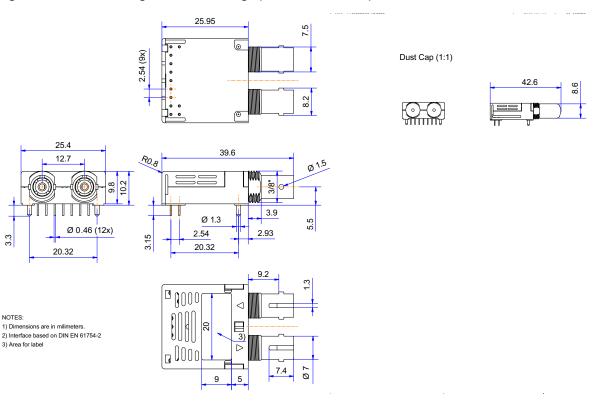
1 × 9 SC Package Outline Drawings (Dimensions in mm)
